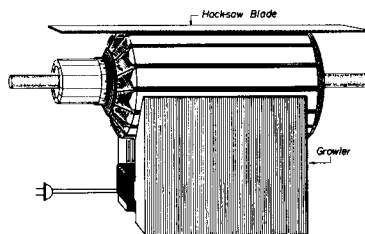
Testing an armature for shorts by placing a hack-saw blade over the top slot.
